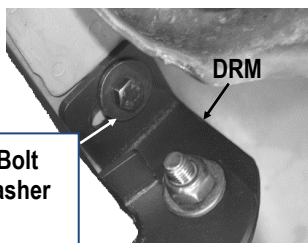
Driver Rear Support Bracket Mounted to Pinch Weld
